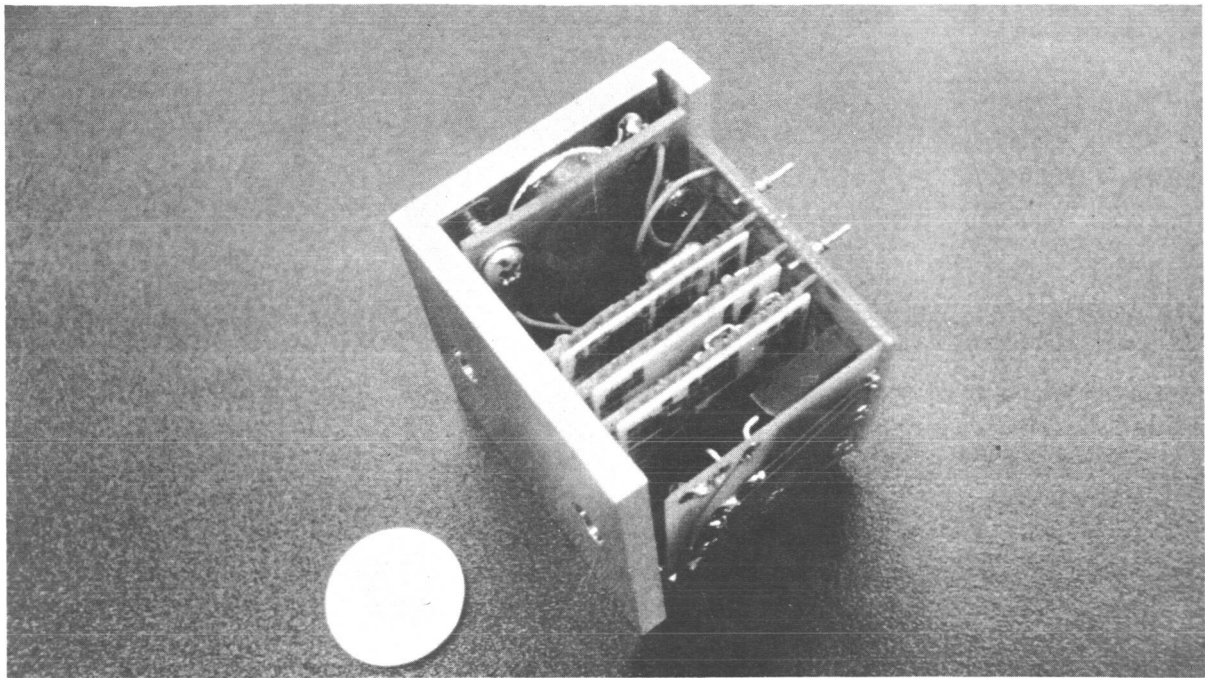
Hybrid Inverter Module Assembly Before Conformal Coating
